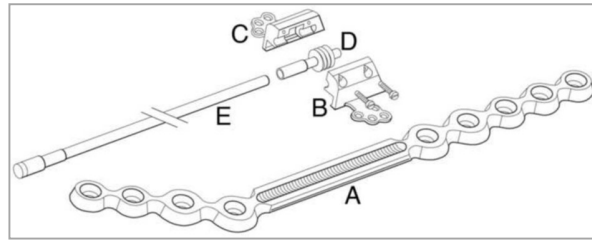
Exploded view of the device proposed by Elsalanty *et al.* 2009 [248]
